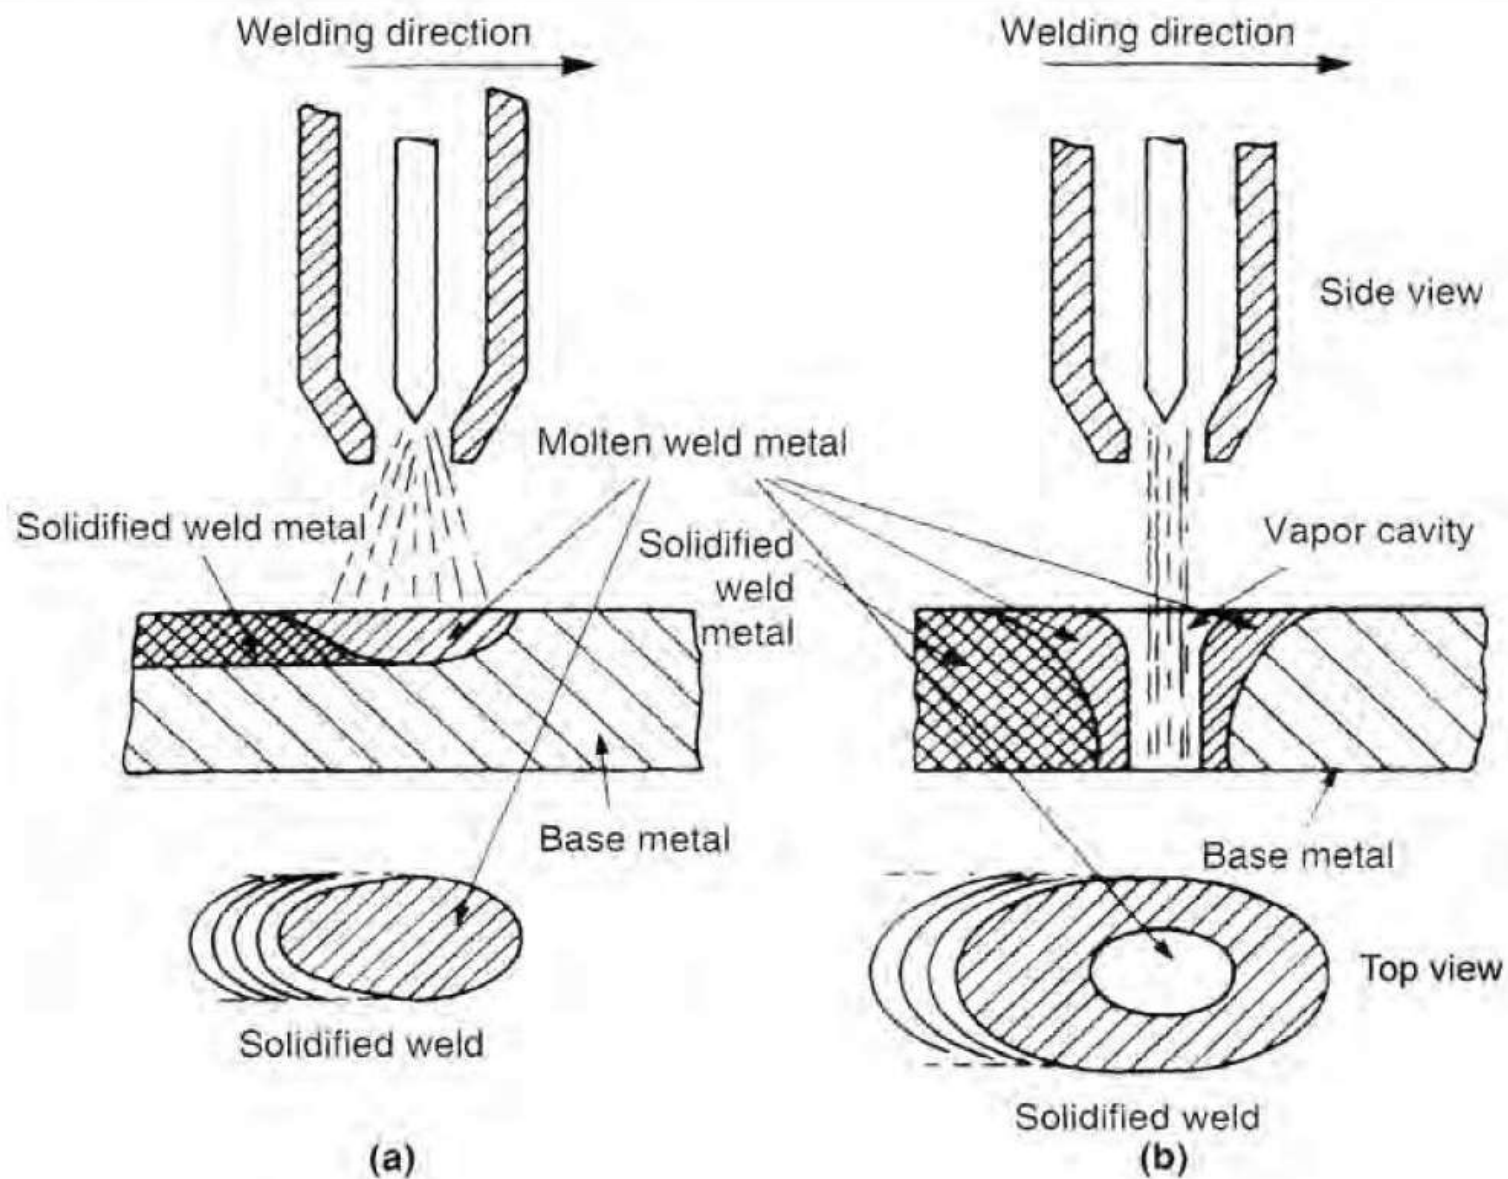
Schematic illustrations of the (a) electron beam welding and (b) laser beam welding processes. The former is virtually always operated in a hard vacuum, while the latter can operate in air, in an inert gas atmosphere, or in vacuum. Source: Ref 2
